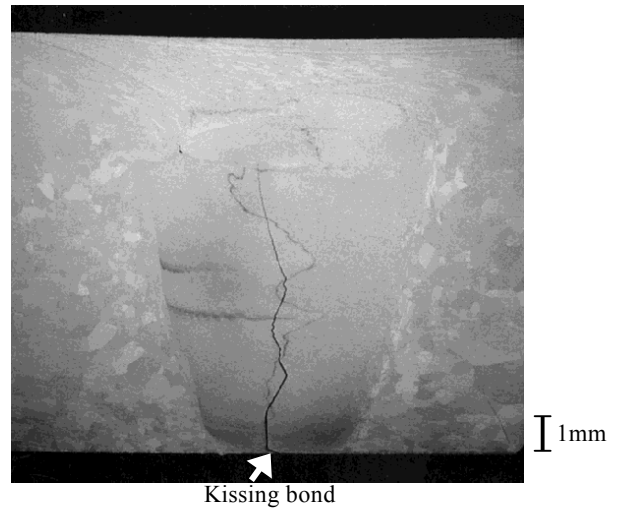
Macroscopic photograph of the section of FSW of specimen A after the tests
